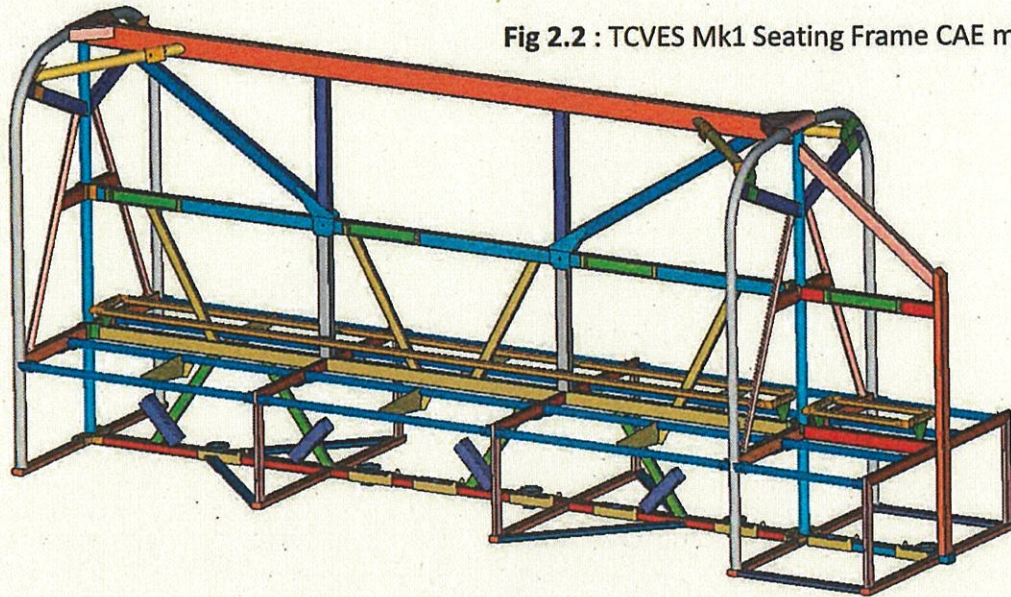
TCVES Mk1 Seating Frame CAE model
